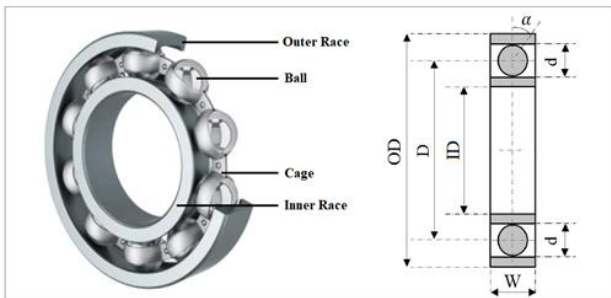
Fundamental dimensions of Deep-groove bearing (OD: outer race diameter; D: pitch diameter; ID: inner diameter or bore diameter; d: rolling element diameter, W: raceway width, α : contact angle [52])
